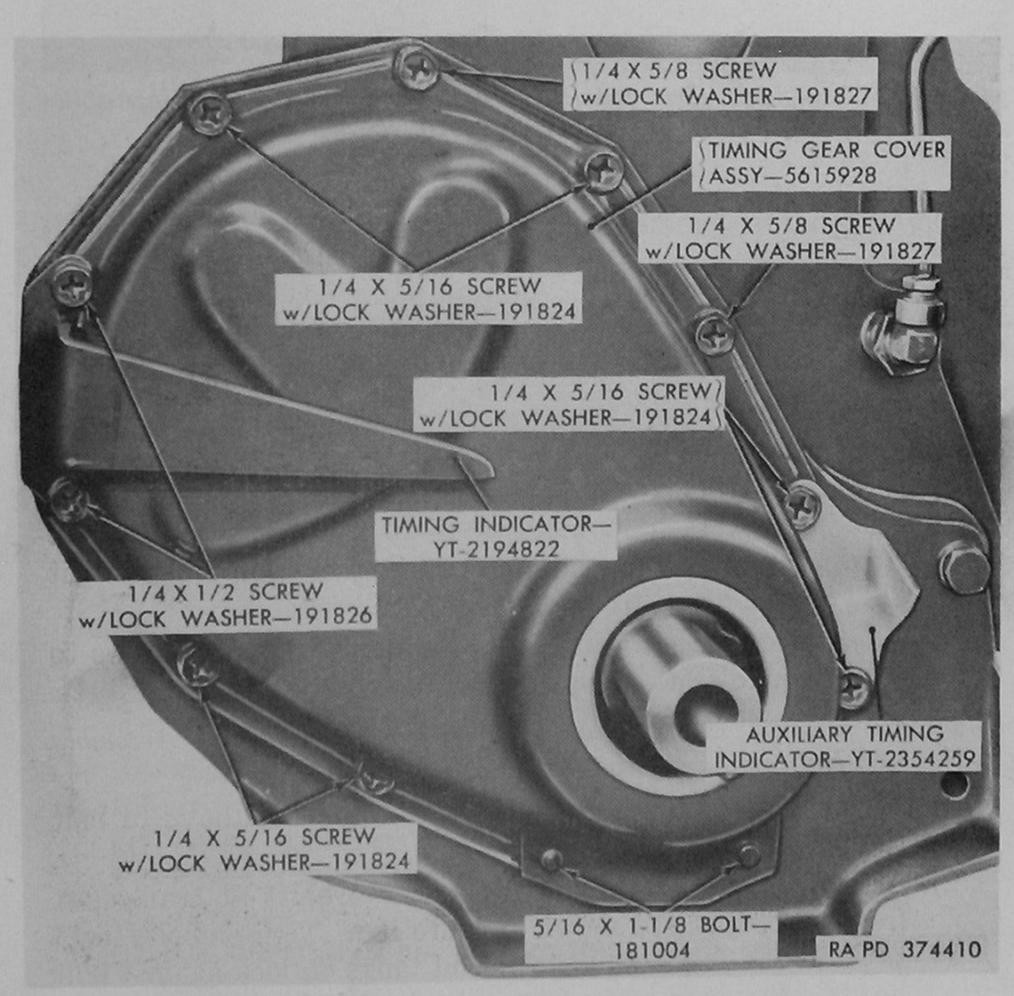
Timing gear cover and timing indicators installed—engine assembly 8329440.
